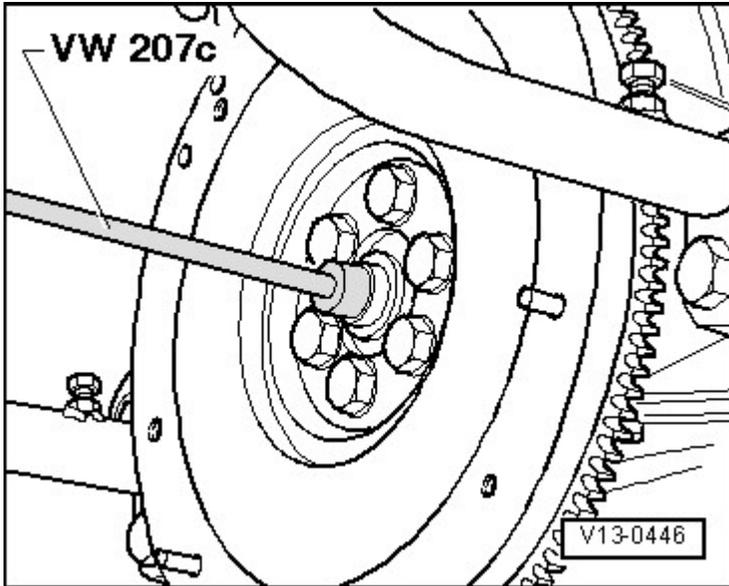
Driving In Needle Bearing Using Drift VW 207 C
